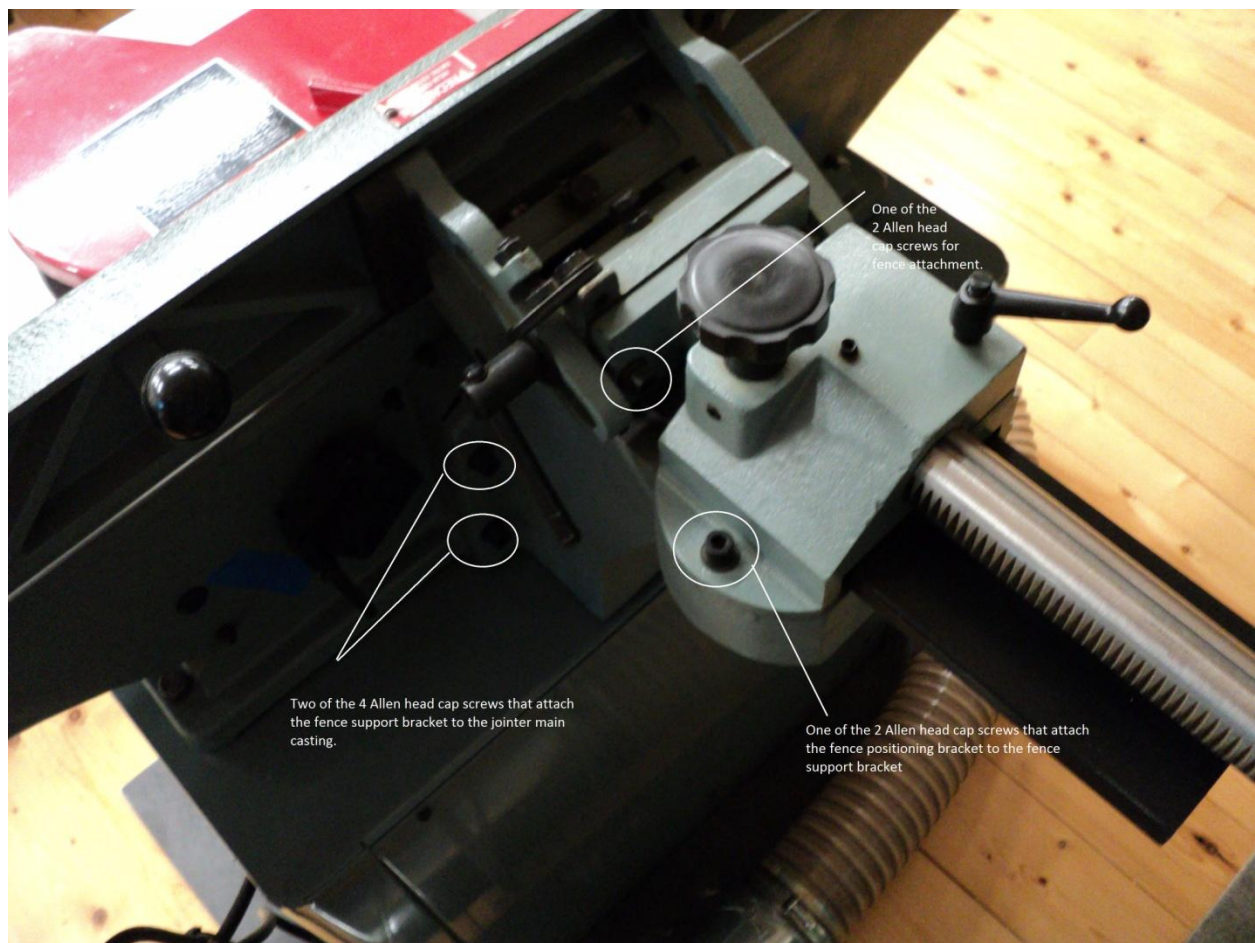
Details of bolts that must be removed for disassembling the jointer
